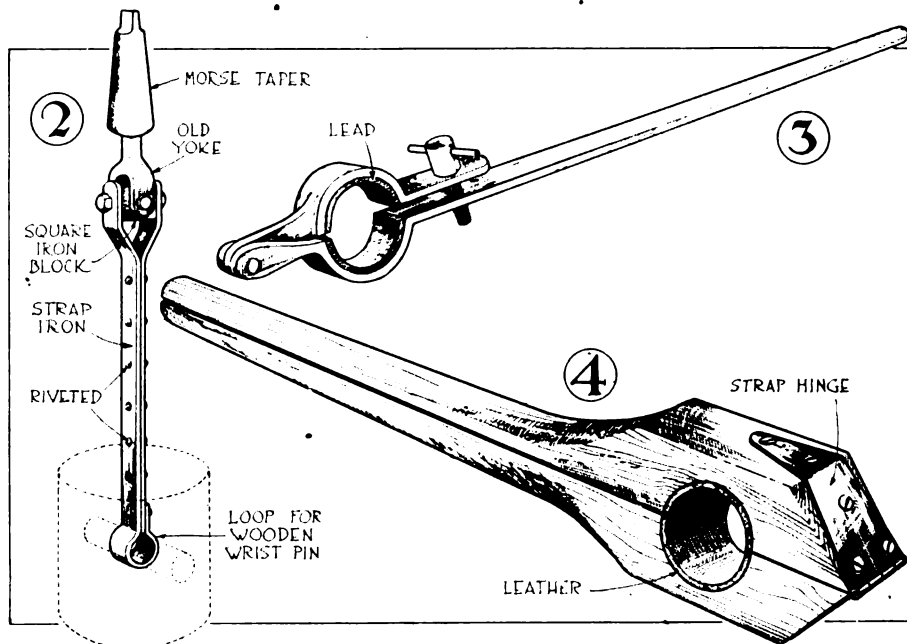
Piston-lapping connecting-rod with universal joint to allow piston to find its alignment
